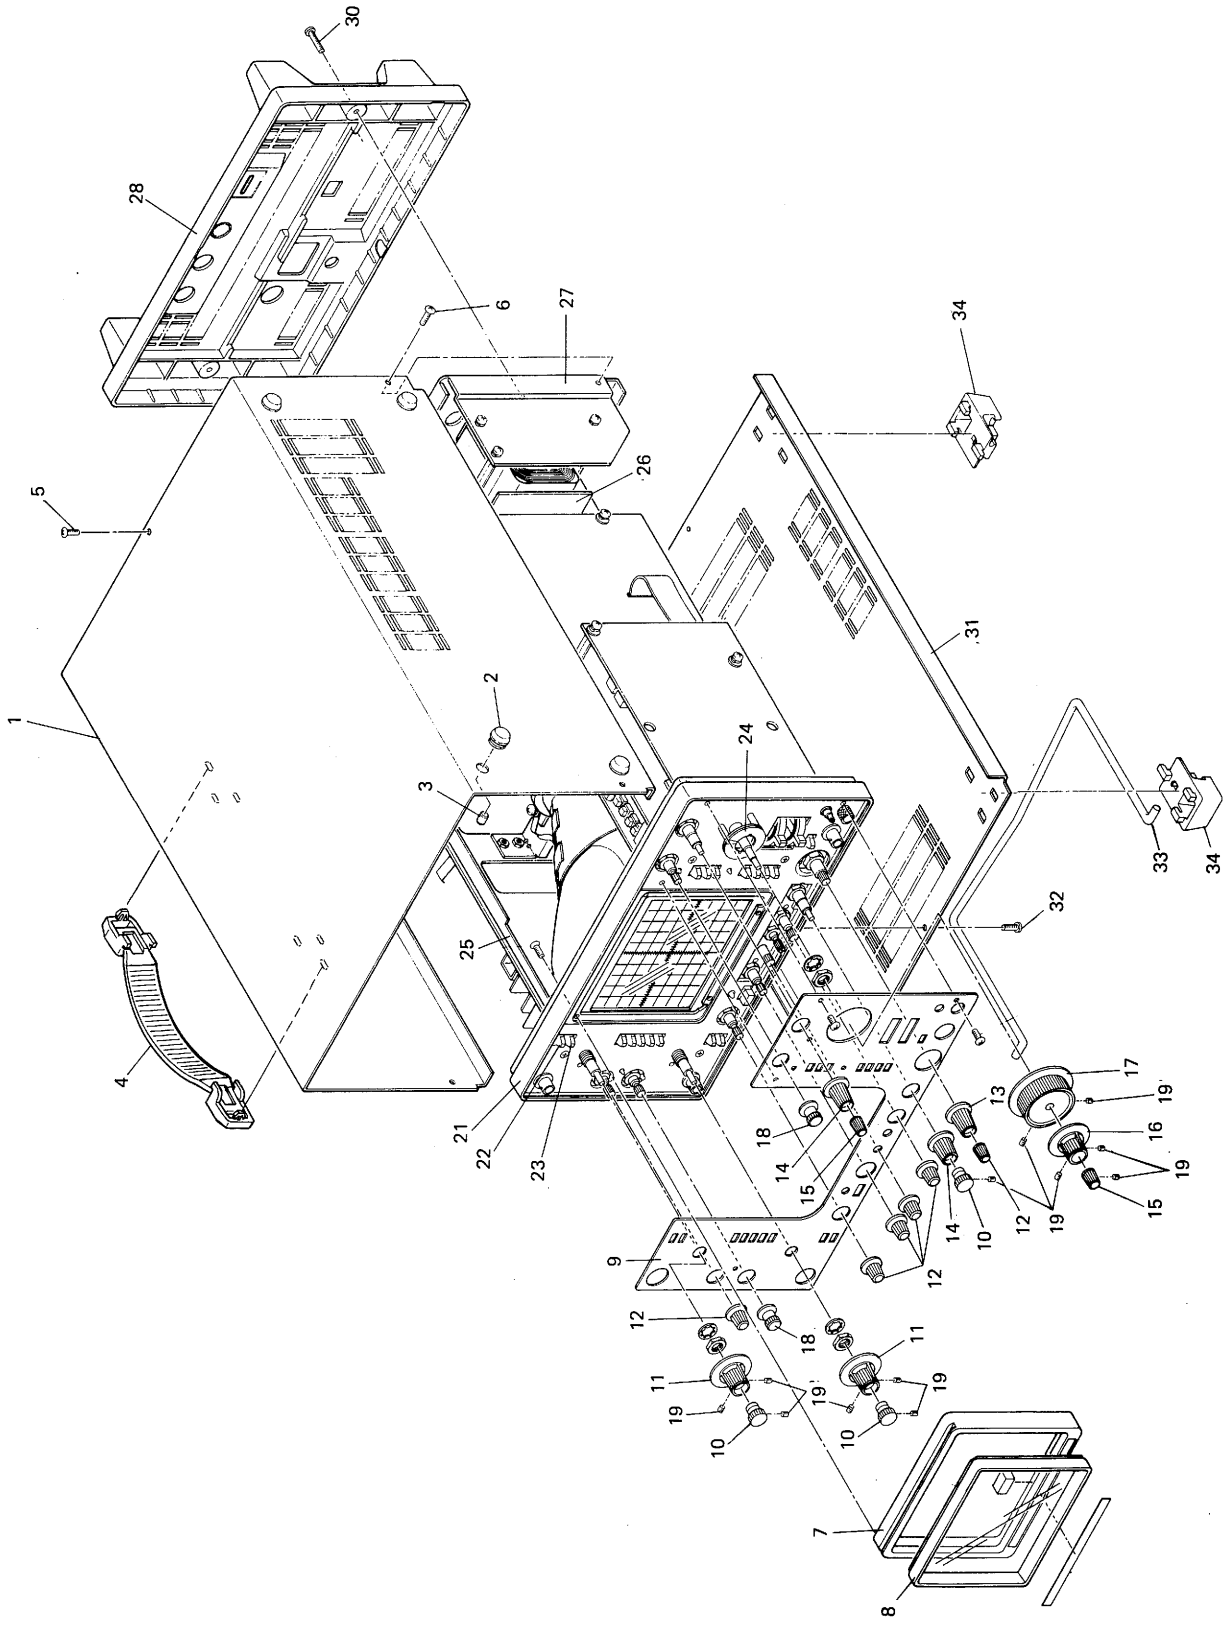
Mechanical Drawing (SS-5705A/5706A)
